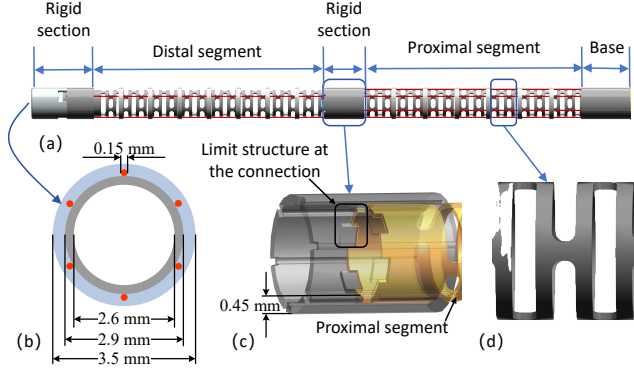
Schematic diagram of the continuum structure. (a) Continuum structure. (b) End view. (c) Rigid section and flexible segment assembly structure. (d) Ni-Ti skeleton notched beam structure.
